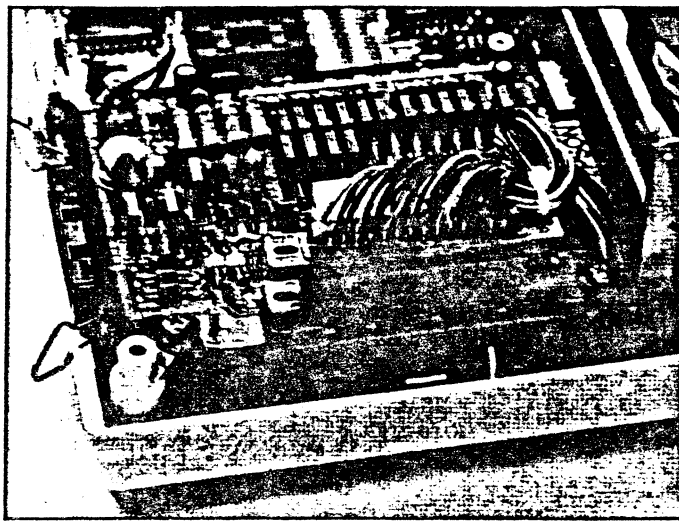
Remove the driver board from the control board by removing the two Phillips screws along the right side of the driver board.
